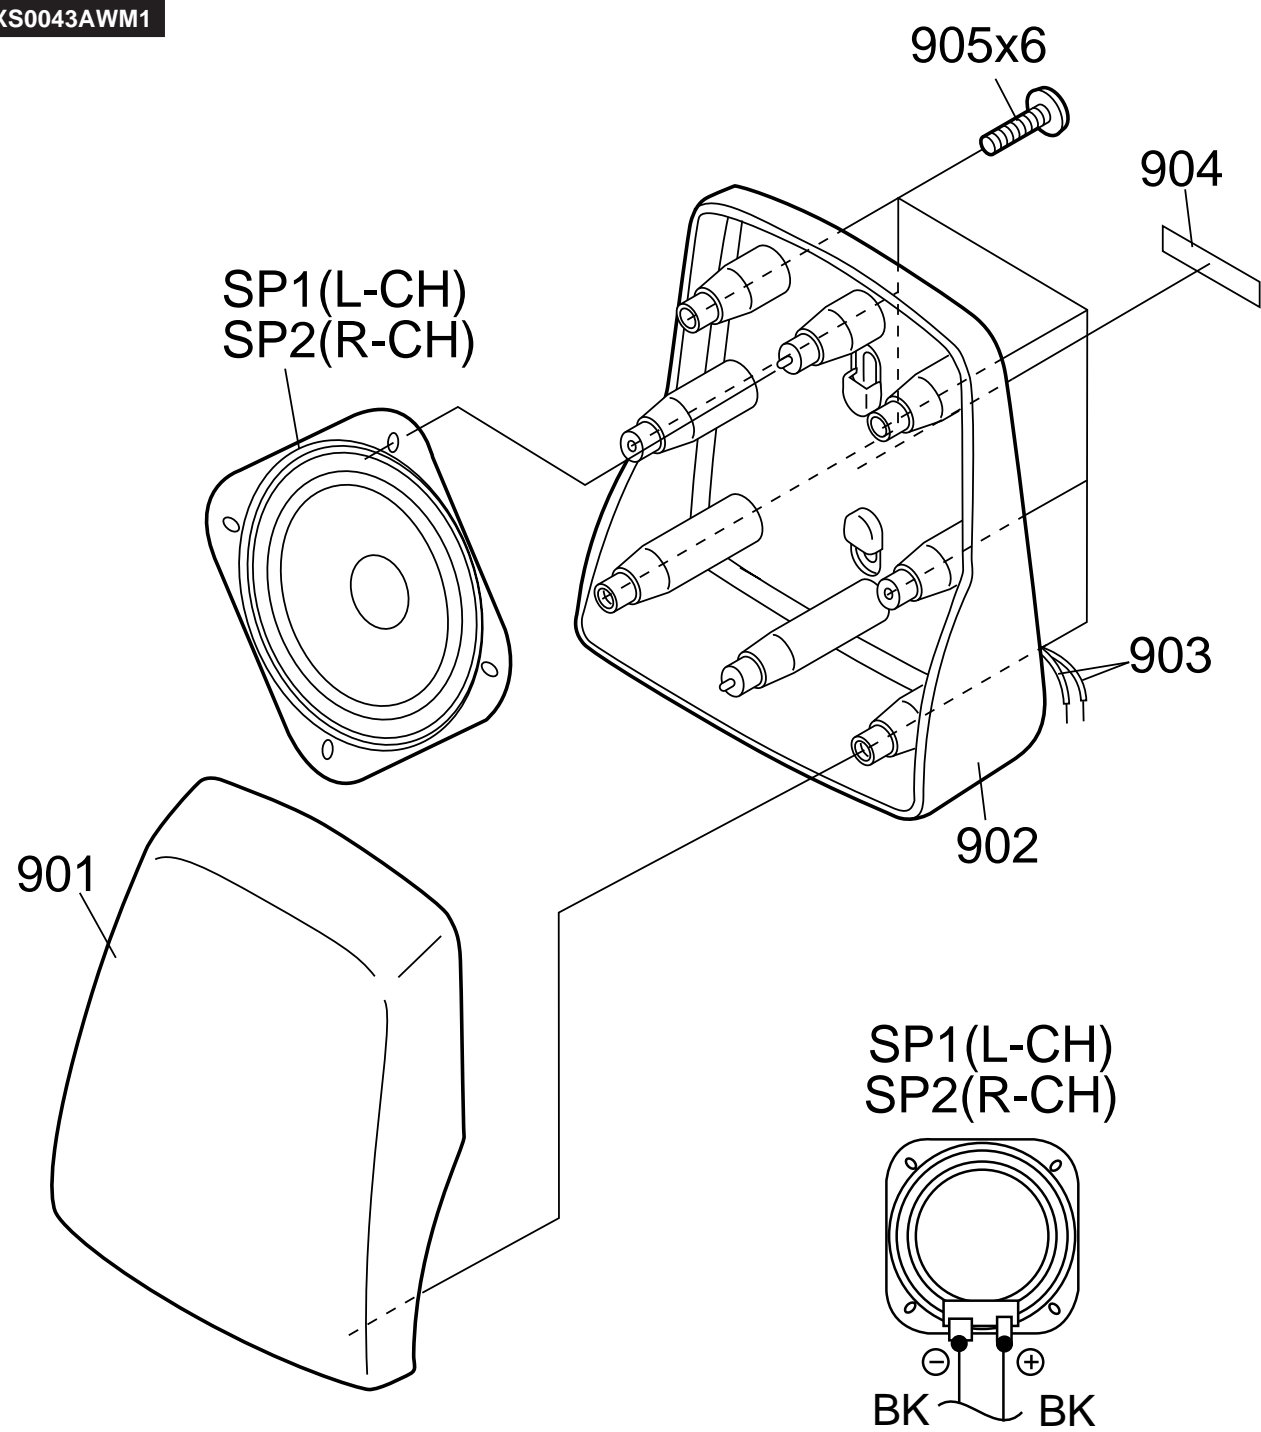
SPEAKER EXPLODED VIEW (2/2)
